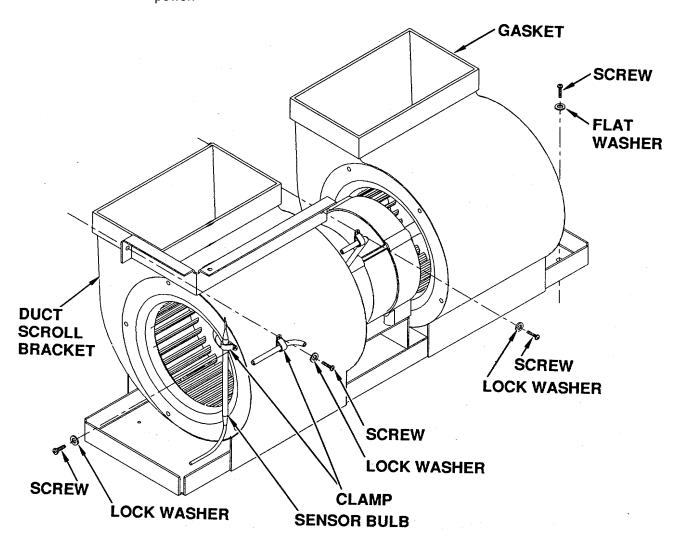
Evaporator Fan Assembly Removal/Replacement
